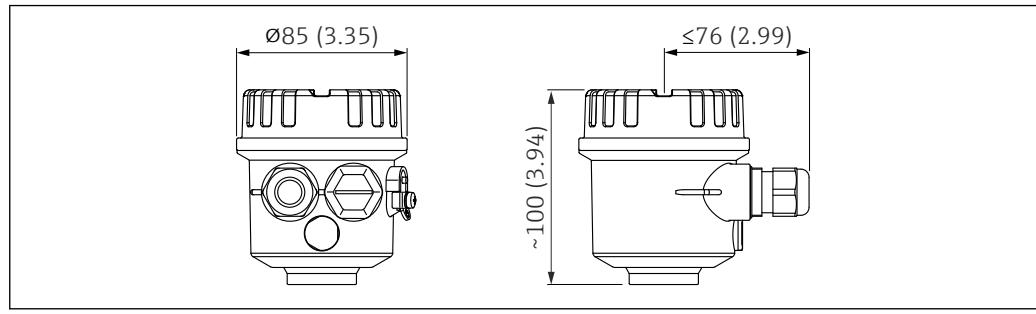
Dimensions of plastic housing. Unit of measurement mm (in)
